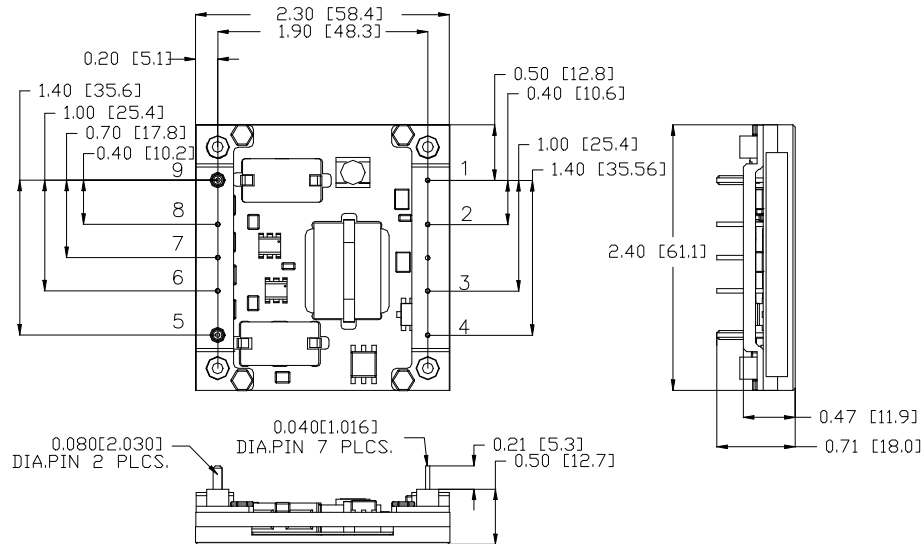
AEH60 - baseplate outline drawing (bottom view)
